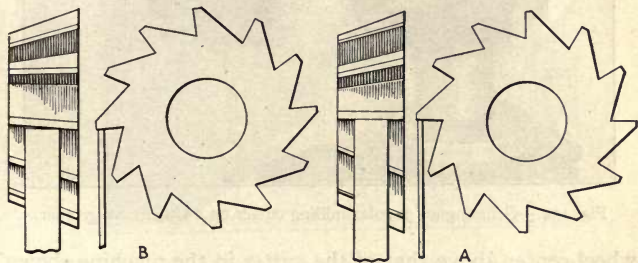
Correct and incorrect methods of locating angular cutters for grinding.
